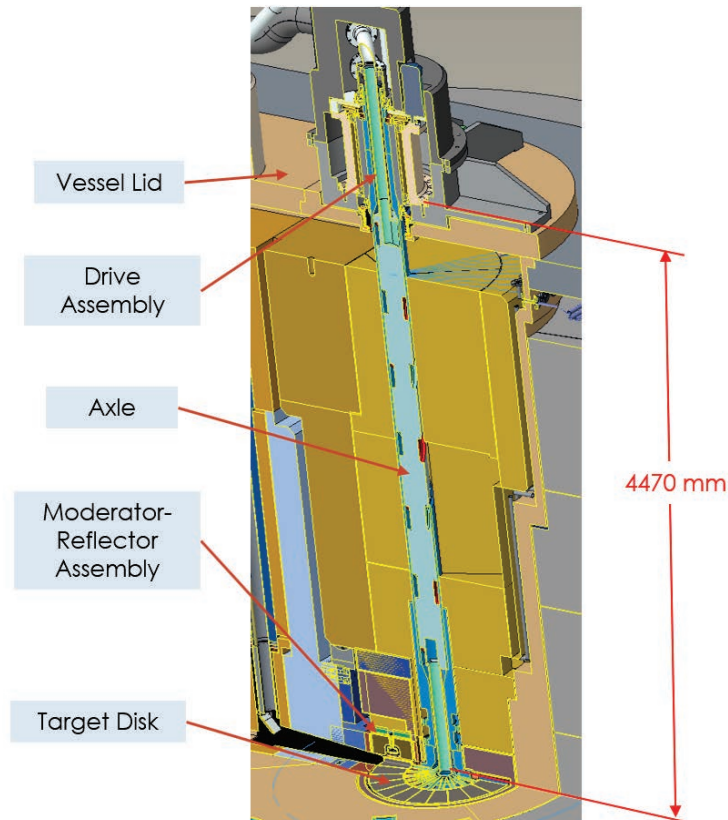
Vertical section view of rotating target assembly in the STS monolith.
